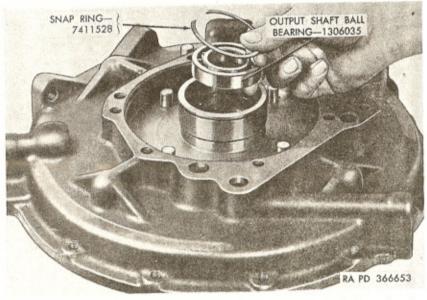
Output shaft bearing and snap ring removed from bearing retainer.
